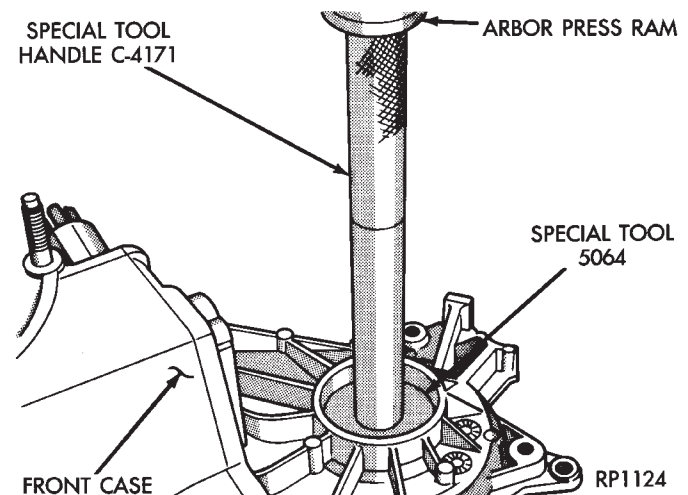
Installing Front Output Shaft Front Bearing In Case
